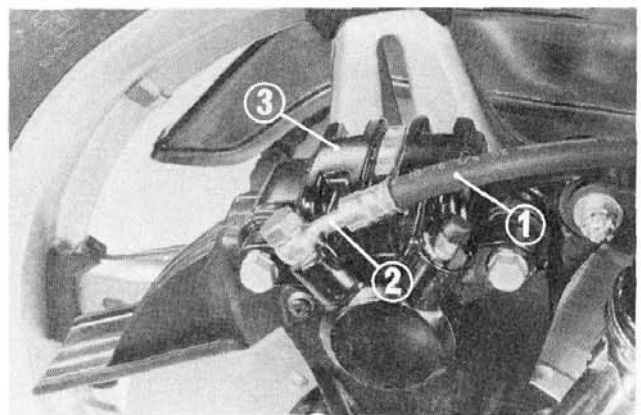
① Brake hose ② Bent side ③ Caliper
